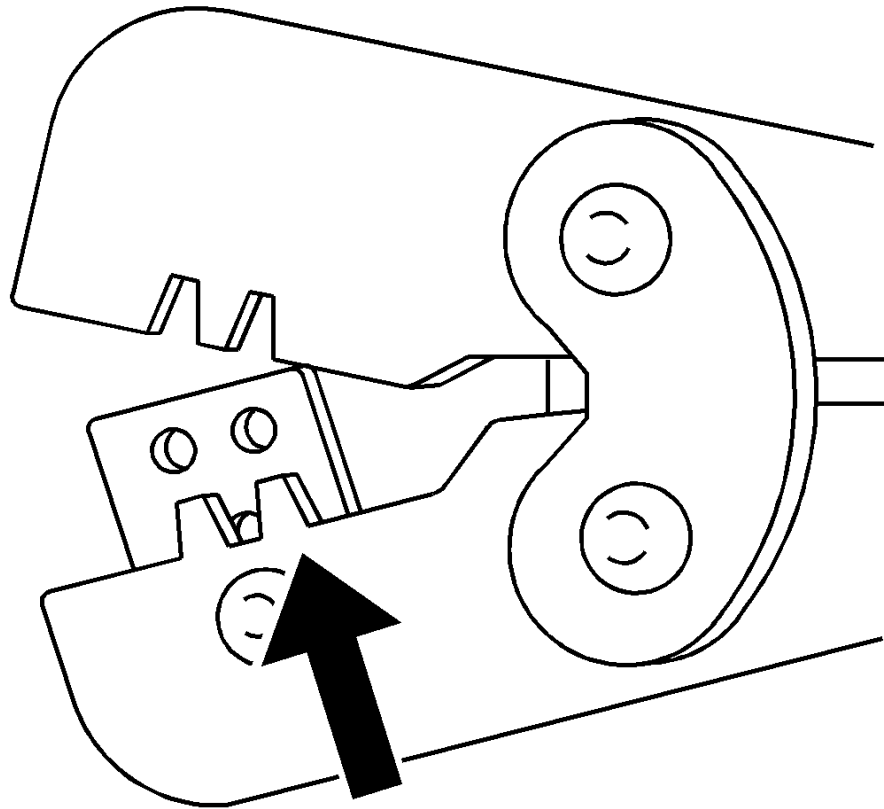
Identifying Crimping Tool Spring Loaded Locator
